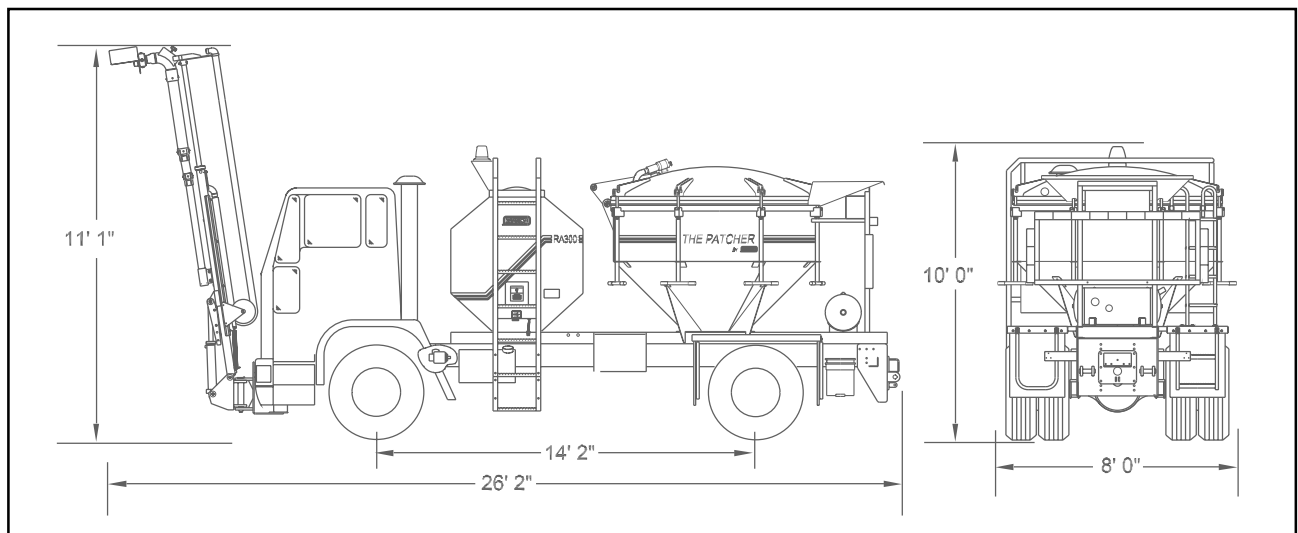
OUTLINE DIMENSIONAL DRAWING WITH BOOM UP
